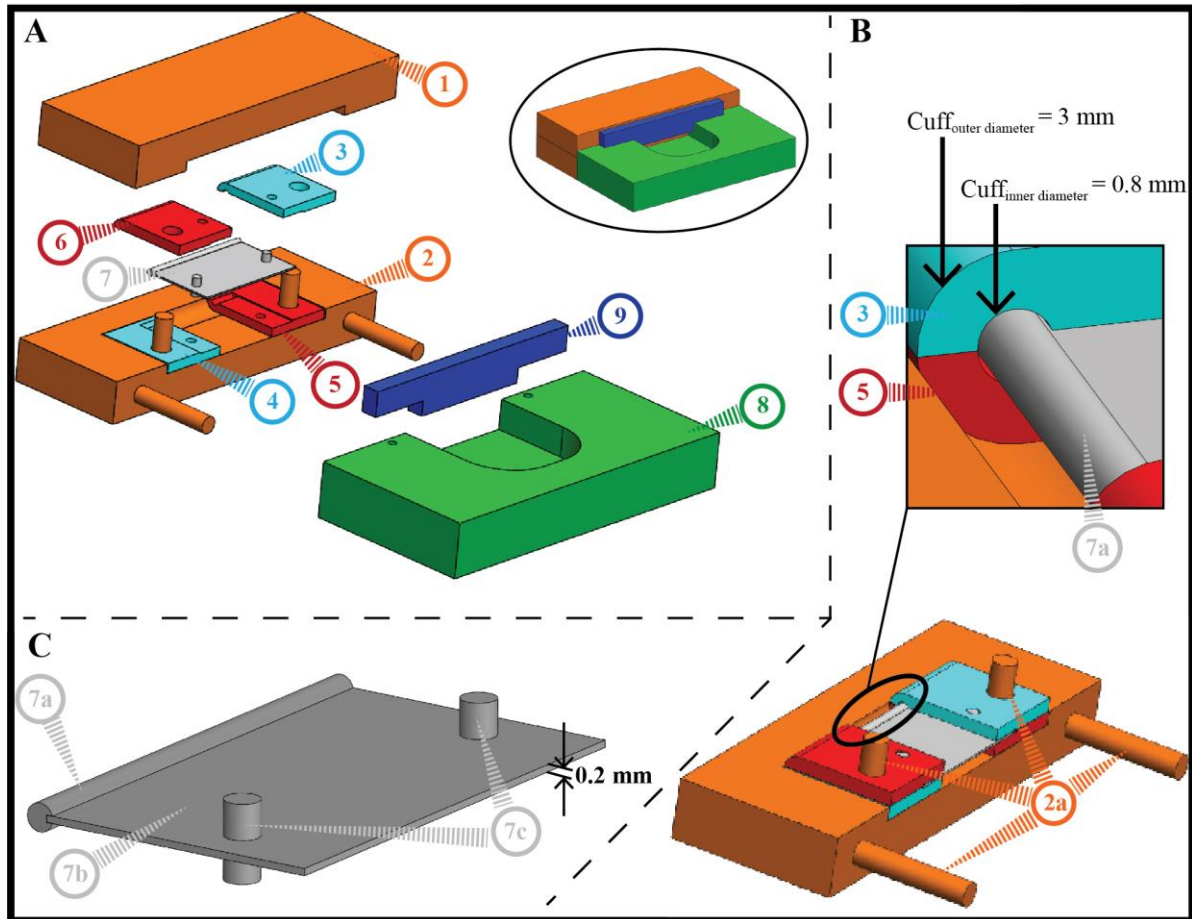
Project of the multi-part mold comprising 9 individualized parts for cuff molding, as designed in Solidworks. A) Exploded view. Orange parts (1, 2) define the outer surfaces of the cuff structure. Red (3, 4) and blue (5, 6) parts define the thickness of tabs used to open, close and handle the cuff. These parts (3-6) also shape the cuff outer diameter and serve as support structures for part 7. Part number 7 defines the inner surfaces of the cuff structure – namely its cylindrical shape and longitudinal slit that separates the handling tabs. Details on part number 7 are given in B) and C). Part 8 is used to mold PDMS around the silicon die with bond pads, as well as around a printed circuit board that routes with the outside. Part 9 is used to avoid joining of the two handling tabs during molding. Inset in the top right corner shows the fully assembled mold. B) Bottom figure shows a partially assembled mold and details 4 rods (2a). Two vertical rods align and mate all parts relevant to cuff molding (1-7). Two horizontal rods align and mate cuff molding parts with part 8, used for over molding of silicon die and PCB. Top inset figure details parts relevant for molding of cylindrical cuff structures – rod that defines the cuff inner diameter (7a) is 0.8 mm in diameter, whereas the outer diameter (3 mm) is defined by round shaped surfaces in parts 1 and 2. C) Part number 7 and its sub-parts are detailed. Part 7 is an assembly of 7a) a cylindrical rod that shapes the cuff cylindrical part, 7b) a rectangular, $200\ \mu\text{m}$ thick plate that creates the longitudinal slit typical of split-cylinder cuffs, and 7c) two vertical rods, with 1 mm diameter, used for assembling of polyimide foils onto pre-shaped cuffs, by securing of thin polyimide films with holes.
